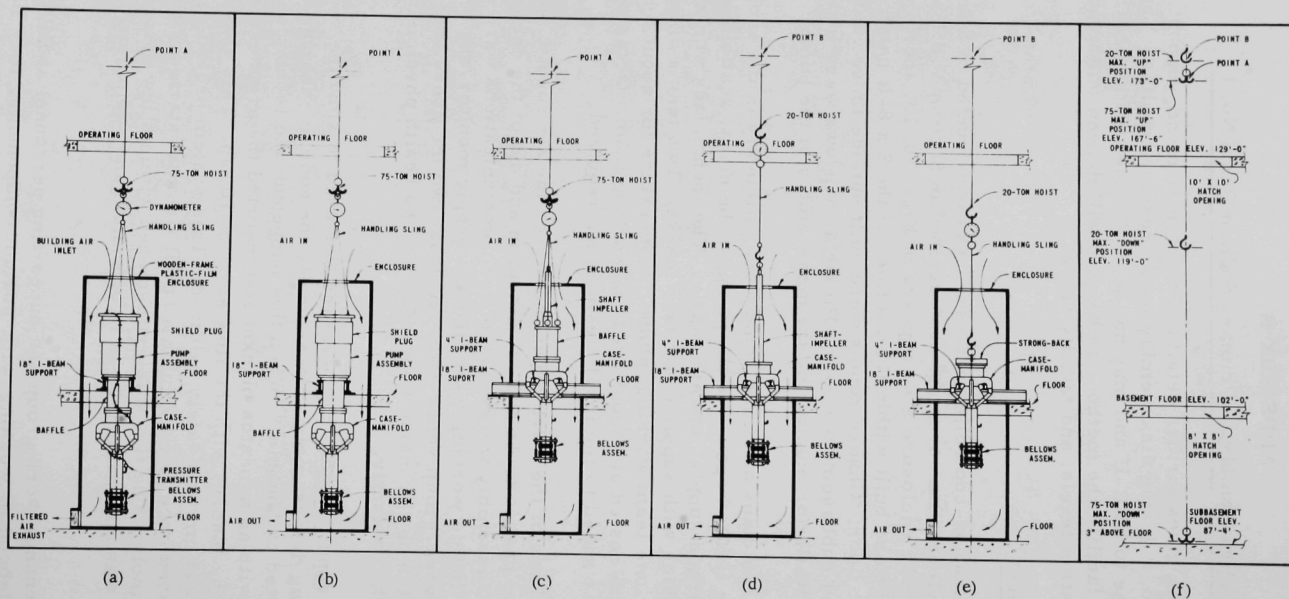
Containment, Handling, and Support of Primary Pump during Disassembly. (a) Complete pump assembly: first position; (b) complete pump assembly: second position; (c) pump assembly, less shield plug; (d) pump assembly, less baffle; (e) pump assembly, less shaft-impeller; (f) dimensions of work area.
